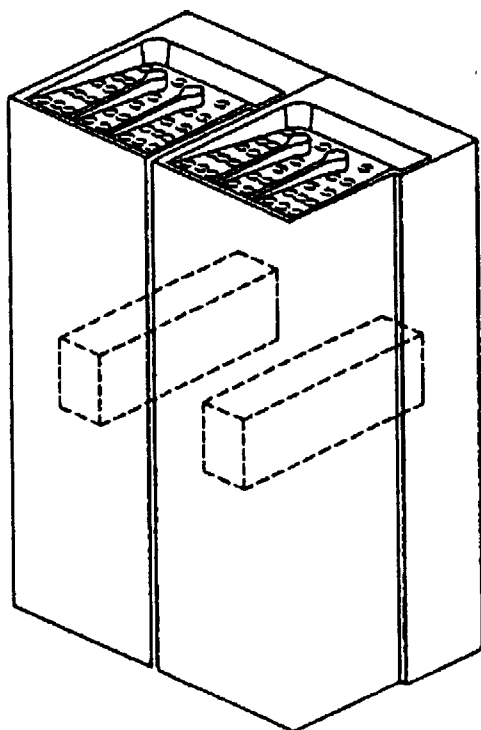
(11) EB welding of two 1/4 blocks
